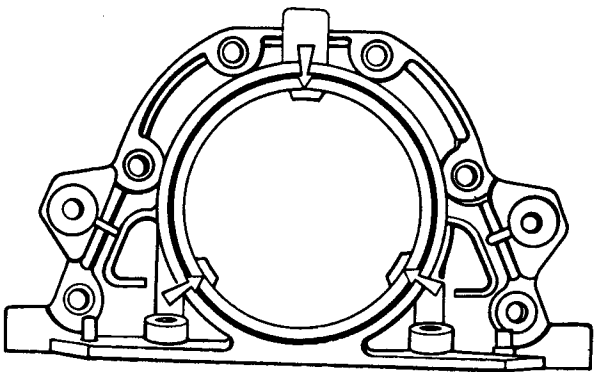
Crankshaft Rear Gland Holder. Arrows Indicate Lugs for Aligning Holder with Crankshaft Flange
